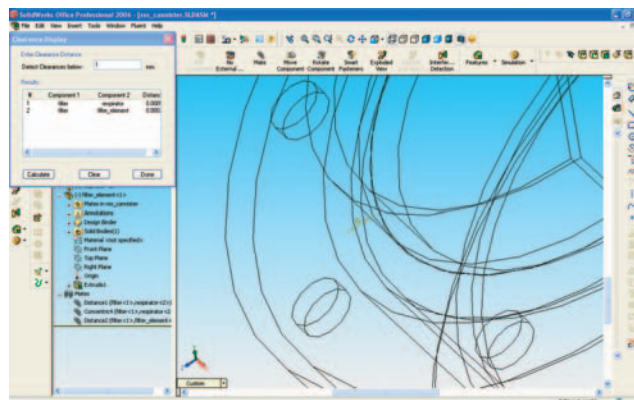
The Clearance Check diagnostic tool in SolidWorks
